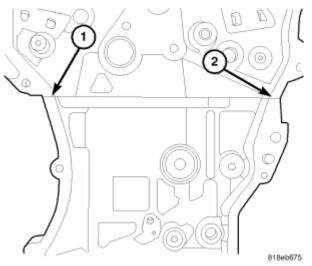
FRONT COVER UPPER T-JOINTS Courtesy of CHRYSLER LLC
